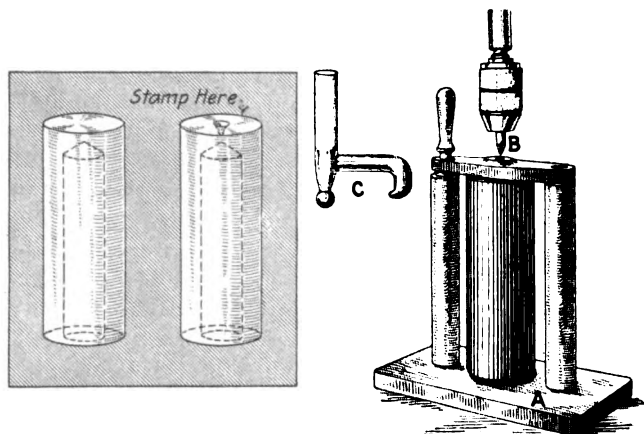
DRILL GUIDE FOR FOOTE-BURT DRILLING MACHINES
